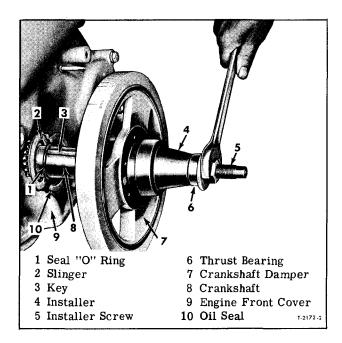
Installing Damper on Crankshaft with Special Tool Set
